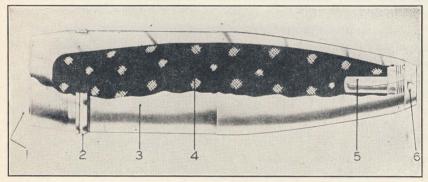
155-mm. High Explosive Shell, Mark I.
